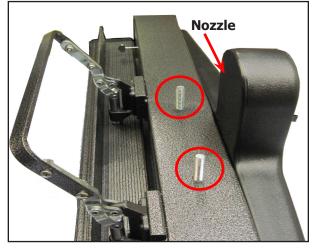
Fluted Knobs Removed from Head Assembly; Nozzle Facing Outward
